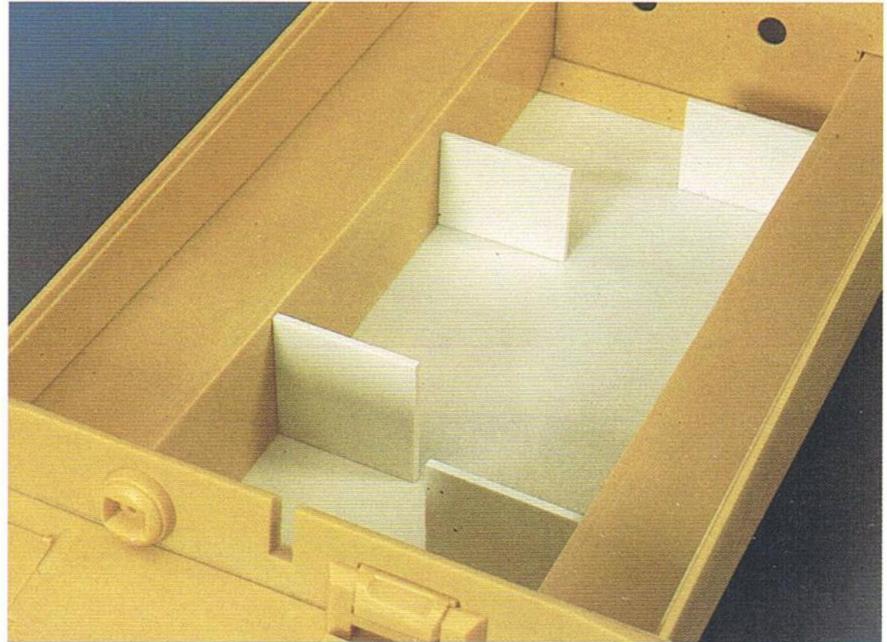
Build up of the hull assembly. Note plastic sheet bottom plate and reinforcement.
